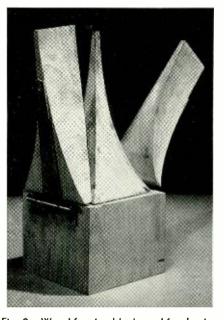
Wood forming block used for shaping and soldering the individual horn sections to uniform dimensions.
